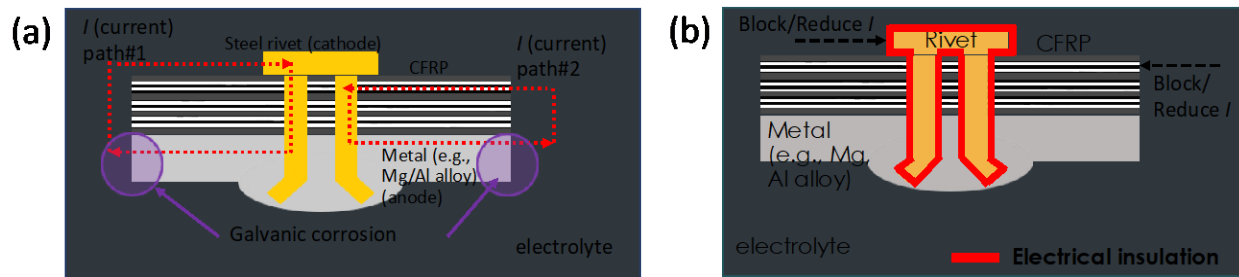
(a) Schematic of galvanic corrosion mechanism due to galvanic current paths for CFRP-metal joint. (b) An illustration of galvanic corrosion mitigation approach to minimize galvanic current paths using an electrical insulated rivet. Source: ORNL.
